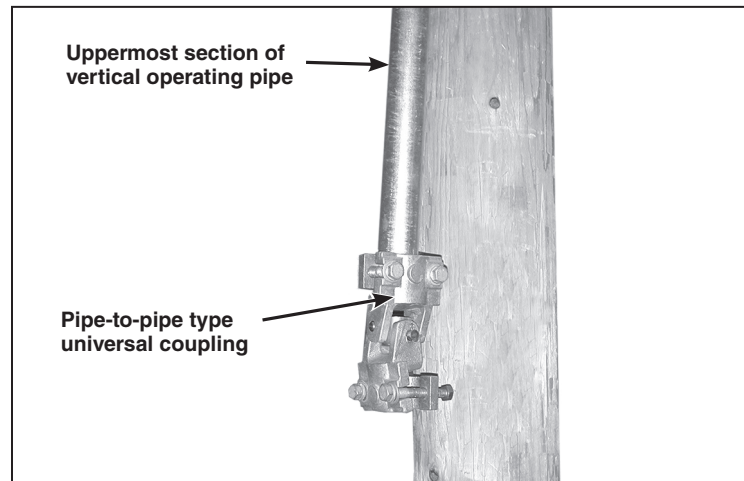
Attach the pipe-to-pipe type universal coupling to the lower end of the vertical operating pipe.
